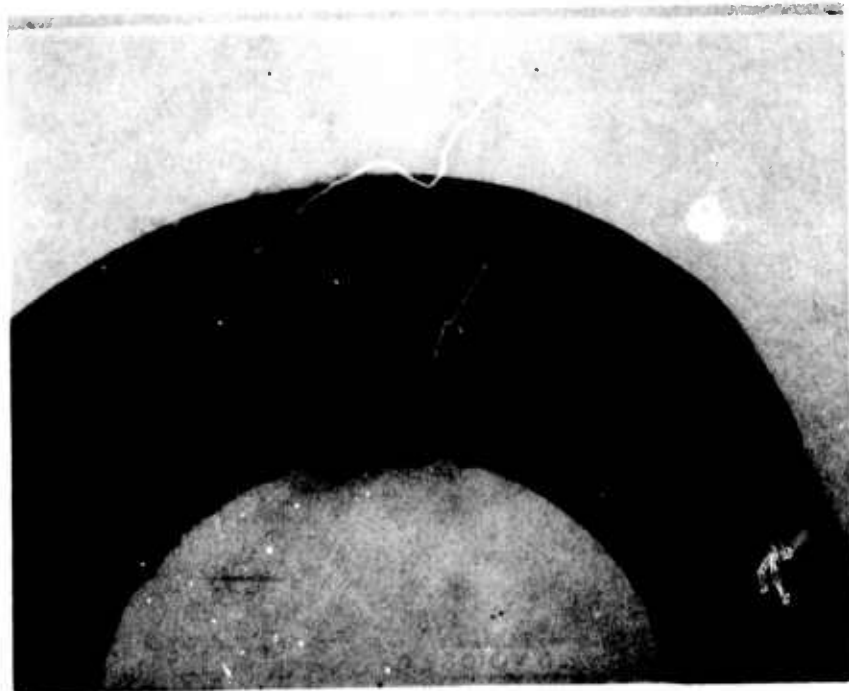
Crack - Roller Shoulder Section, First-Row Pinion.
